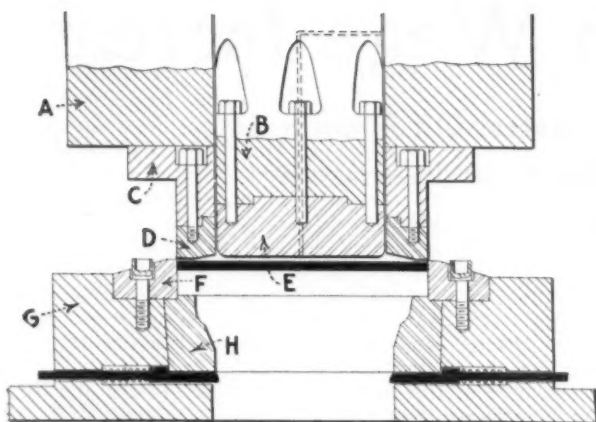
Combination Blanking and Drawing Die Used in Double-Acting Press for Making Brake Drums 16 In. in Outside Diameter and 2 $\frac{3}{4}$ In. High
